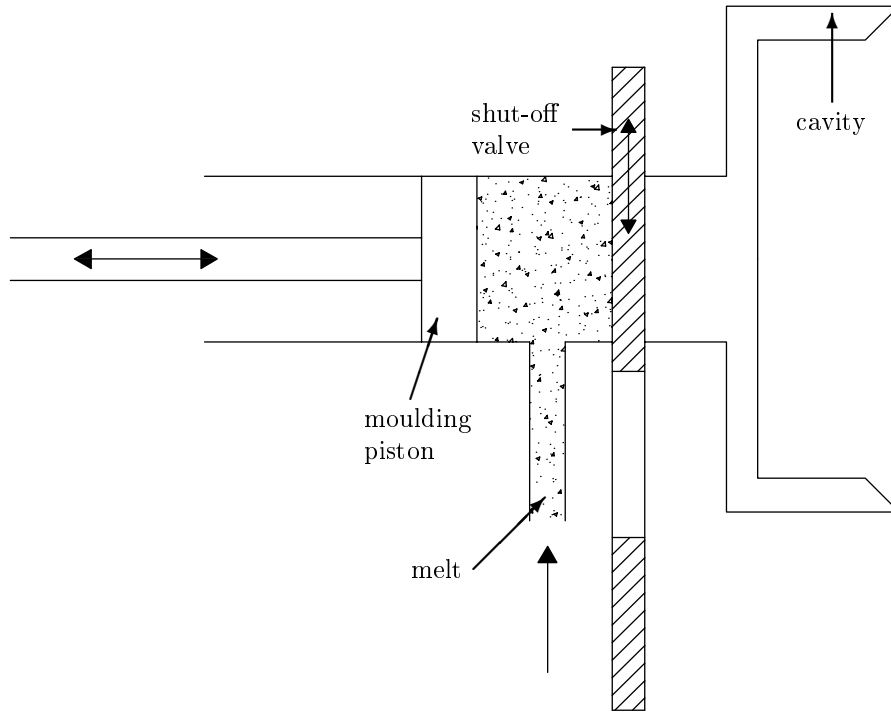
Concept 4: Inline moulding piston and shut-off valve
